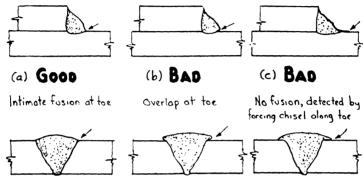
Types of correctly welded and poorly welded fillet and butt joints, cross-sectioned
